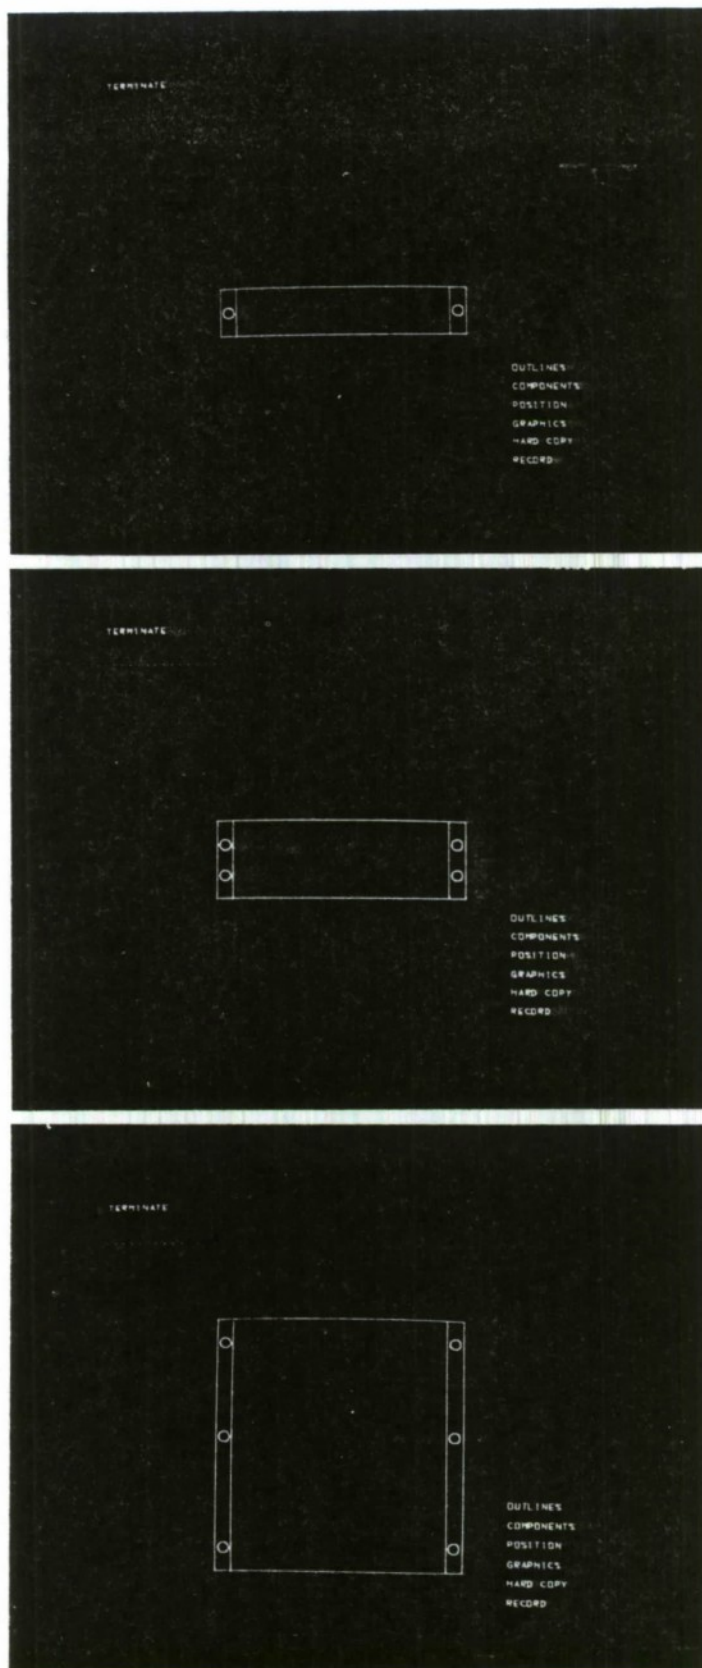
Examples of Standard Panel Outlines with Mounting Holes. Note That the Panel May Get 2, 4, or 6 Mounting Holes Depending on its Size.
